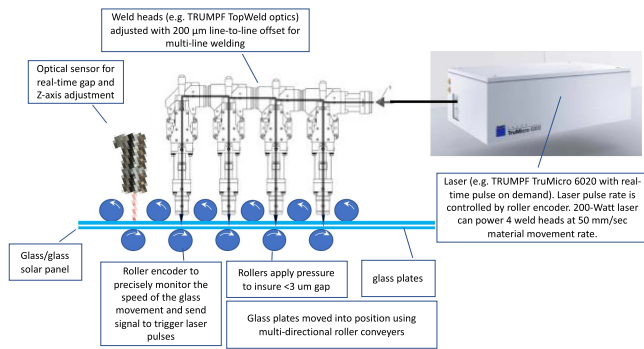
Schematic concept drawing of large area fs laser welding system for solar modules.
